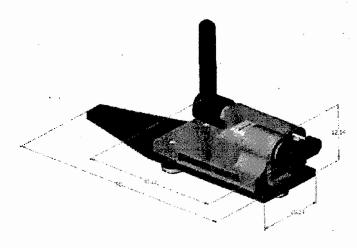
Solid Model of the Final Camera Design. Dimensions are in mm.
